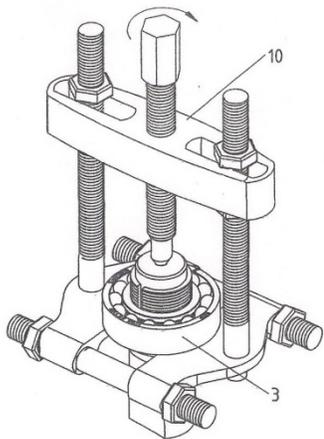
The 3D drawing of the application of an extractor to pull the bearing out of the shaft end
